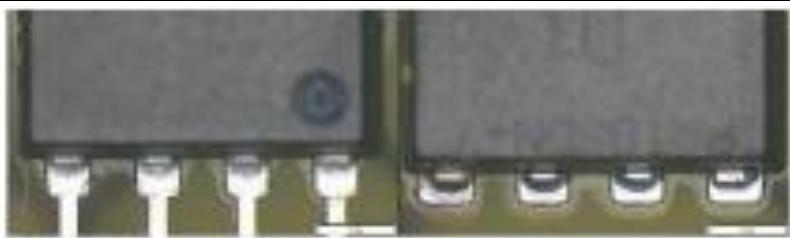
Typical optical photos of SuperSO8 solder joints. Those of gate and source can be seen on the left side. The right side shows the four soldered extensions of the big drain pad.
